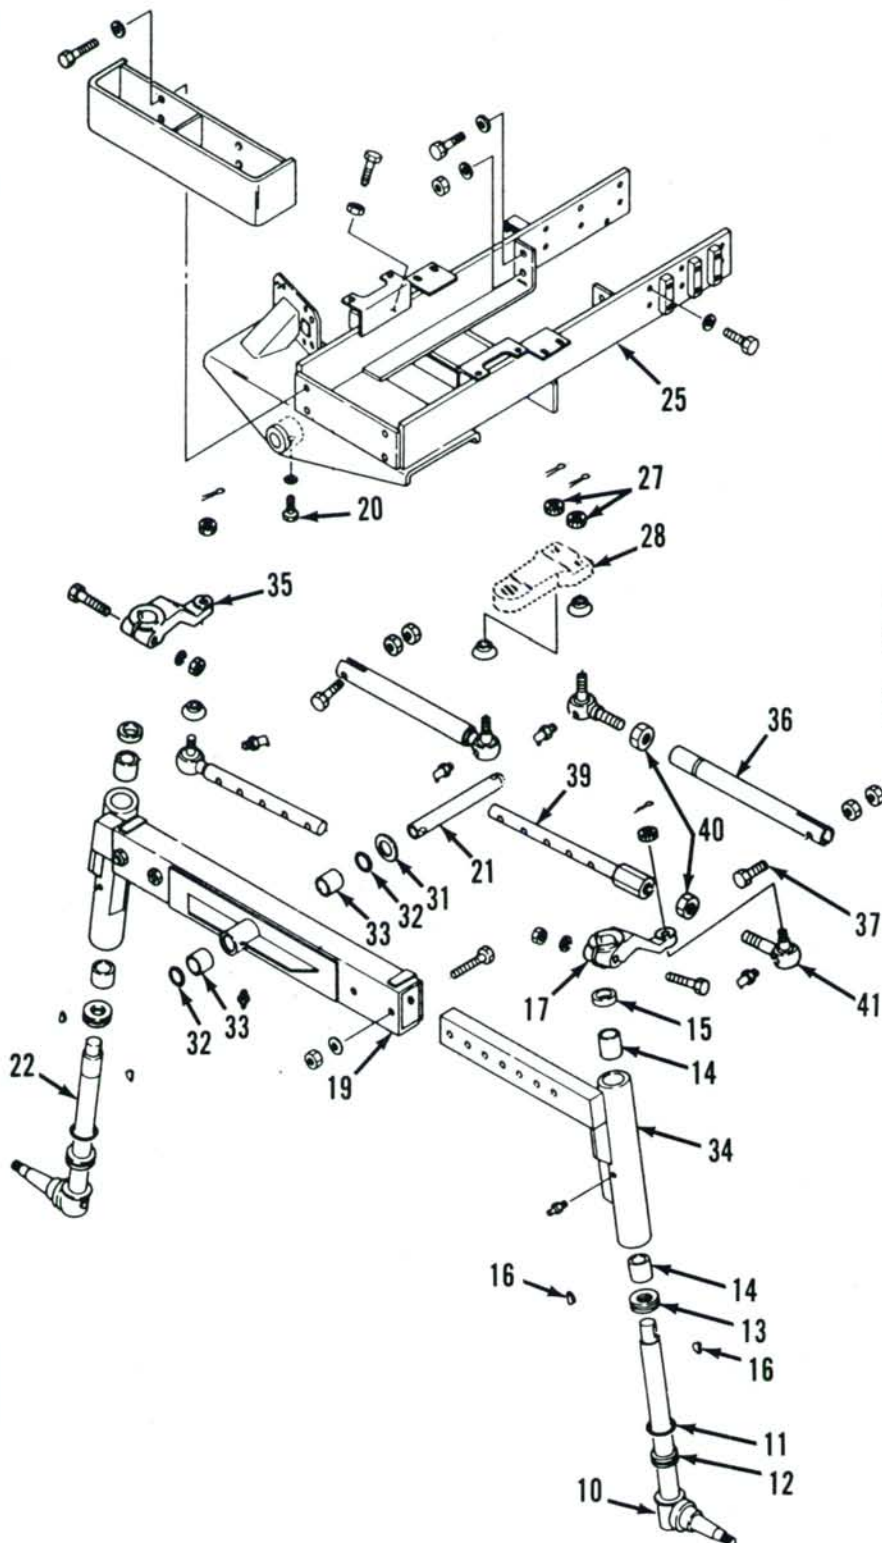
Exploded view of adjustable axle used on 265 models. Axle is offset to right side of engine centerline.
